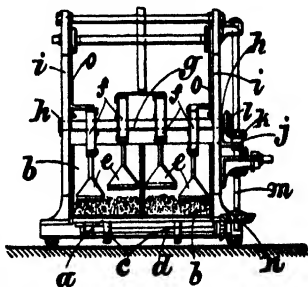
Combined Vibrating and Stamp Action Power Tea Packing Machine (front elevation).
